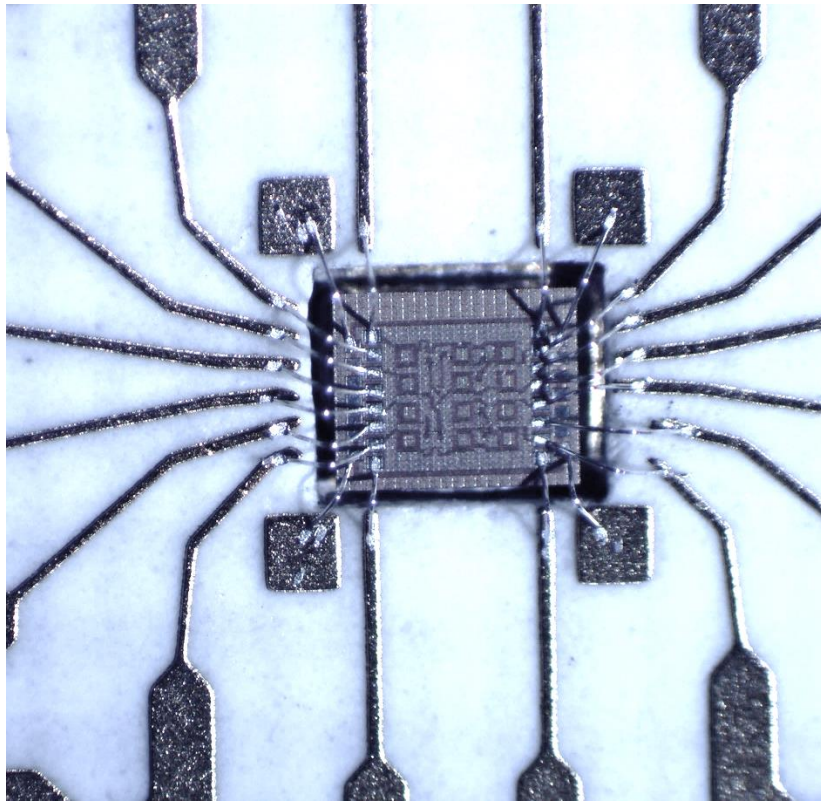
Butler matrix integrated in a PCB board, zoom to the chip area and wire bonding
